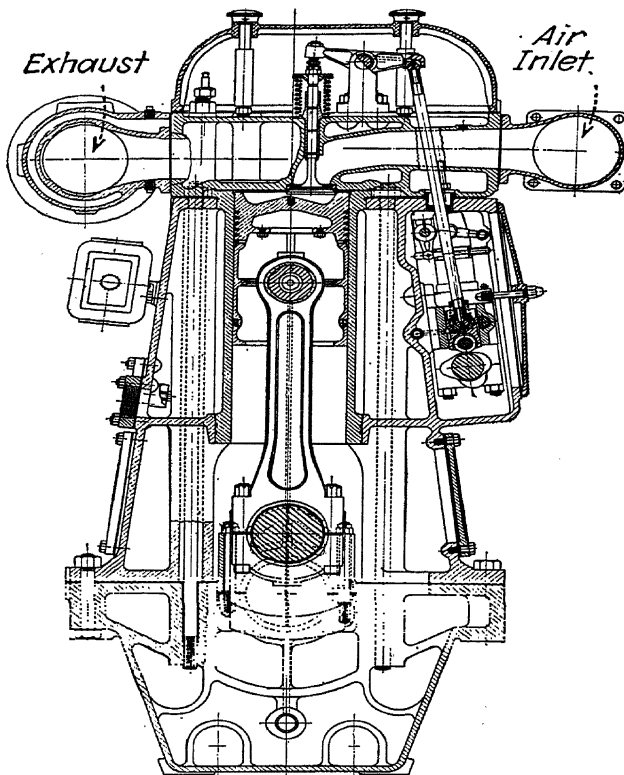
Cross-section of Chicago Pneumatic four-cycle Diesel engine.
